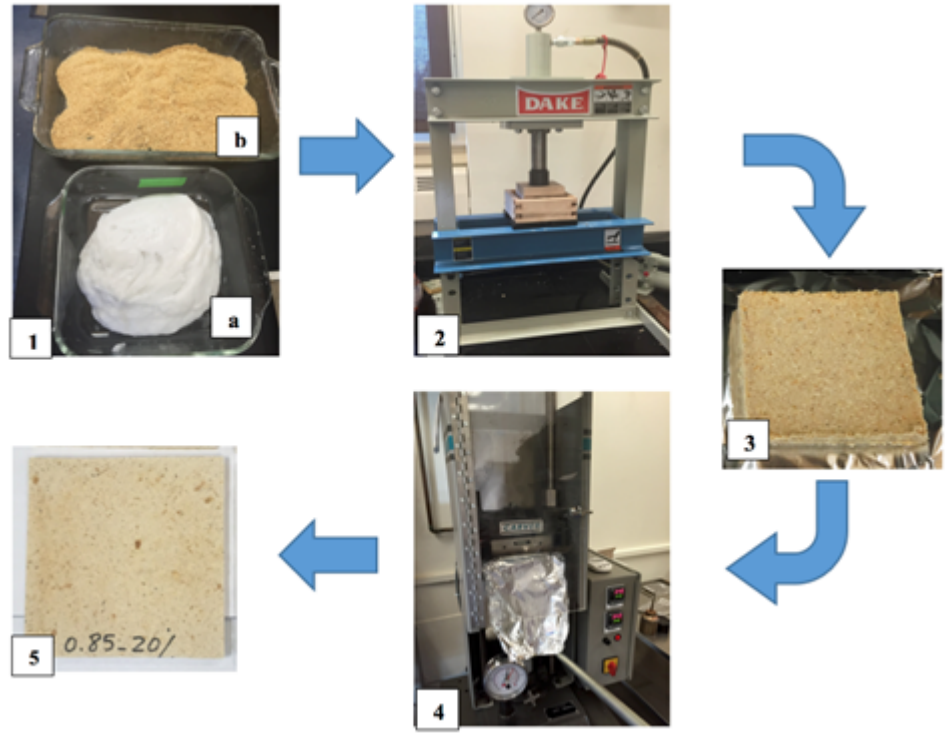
PB panel production procedure: (1) raw materials: (a) 3 wt.% CNF slurry and (b) southern pine WP; (2) forming and cold pressing; (3) cold-pressed mat; (4) hot pressing; and (5) final panel
